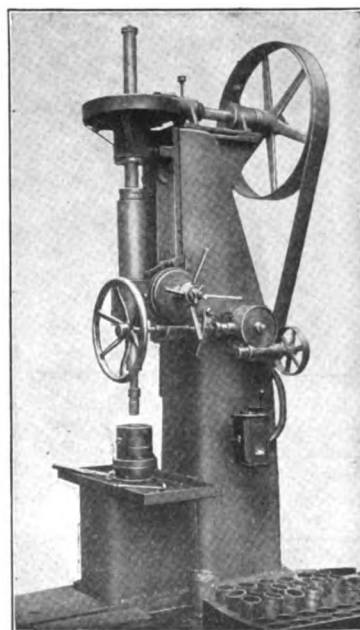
SINGLE-SPINDLE DRILLING MACHINE
